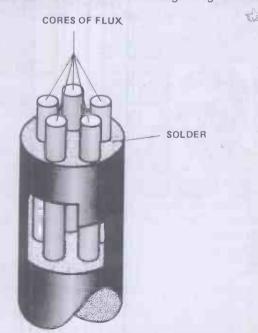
A magnified view of a piece of five-cored solder. The five cores of flux will melt when the solder is heated.
